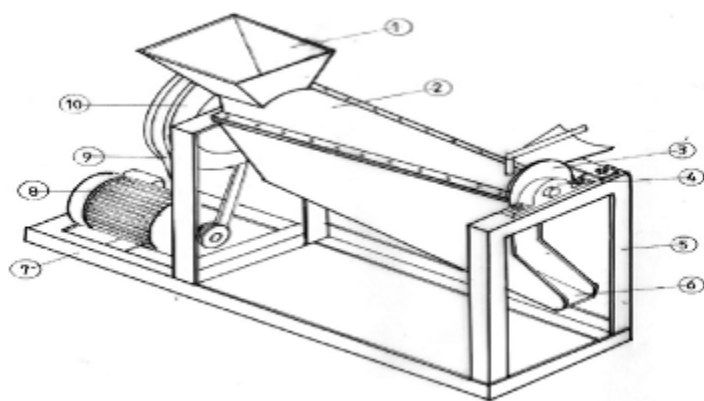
Mini orange juice extractor with component parts as follows 1 - Hopper; 2 - Extraction compartment; 3 - Disc plate; 4 - Bearing housing; 5 - Frame support; 6 - Juice conveyor; 7 - Base stand; 8 - Electric motor; 9- Transmission belt; 10 - Pulley [16]
